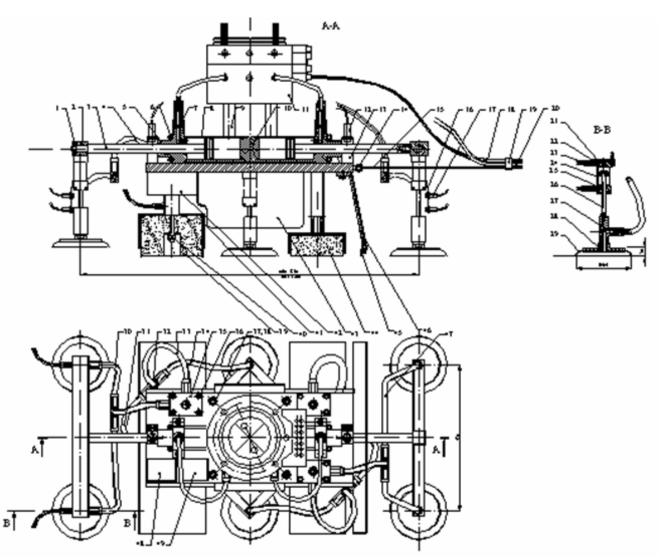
The 2D ensemble drawing of the vacuum robot for cleaning the buildings frontage.
